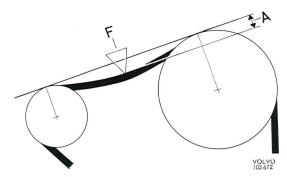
Checking the belt tension $F=5.6-7.6~kp~(12-17~lb.) \qquad A=10~mm~(approx.~3/8'')$
